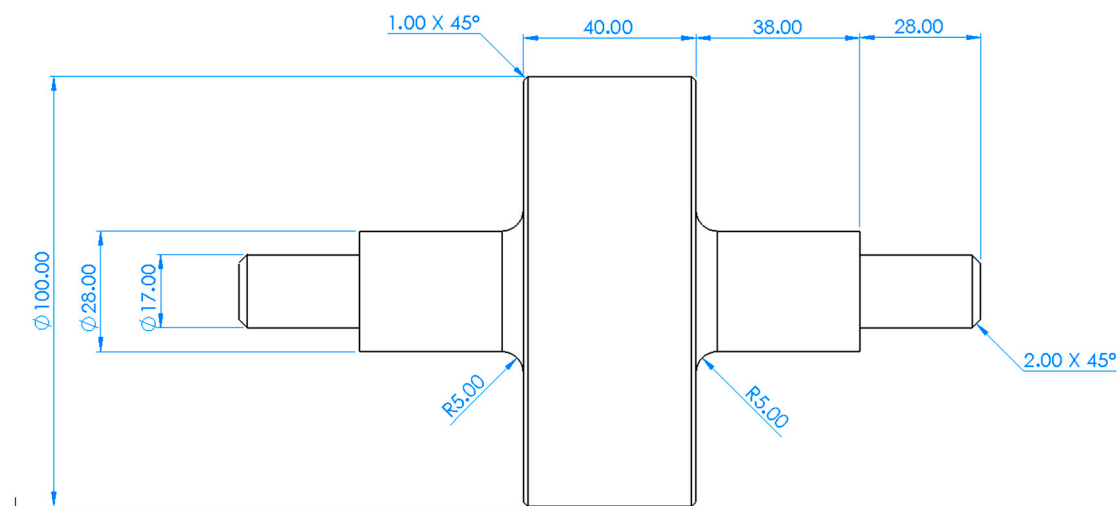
Technical drawing and dimensions of Ø 100 mm FESS rotor.
